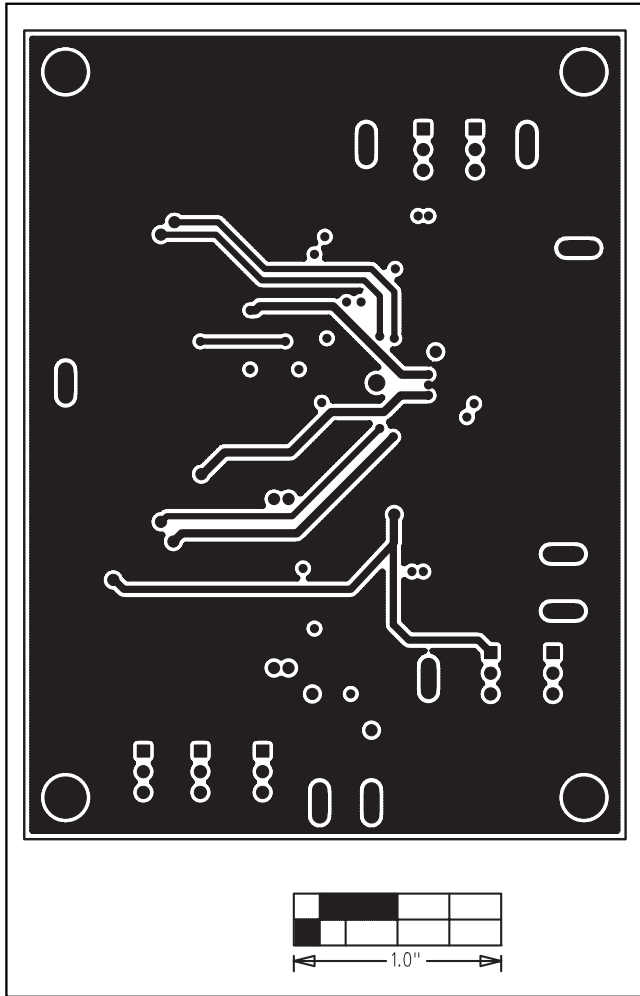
MAX1537 EV Kit PC Board Layout—Layer 2
